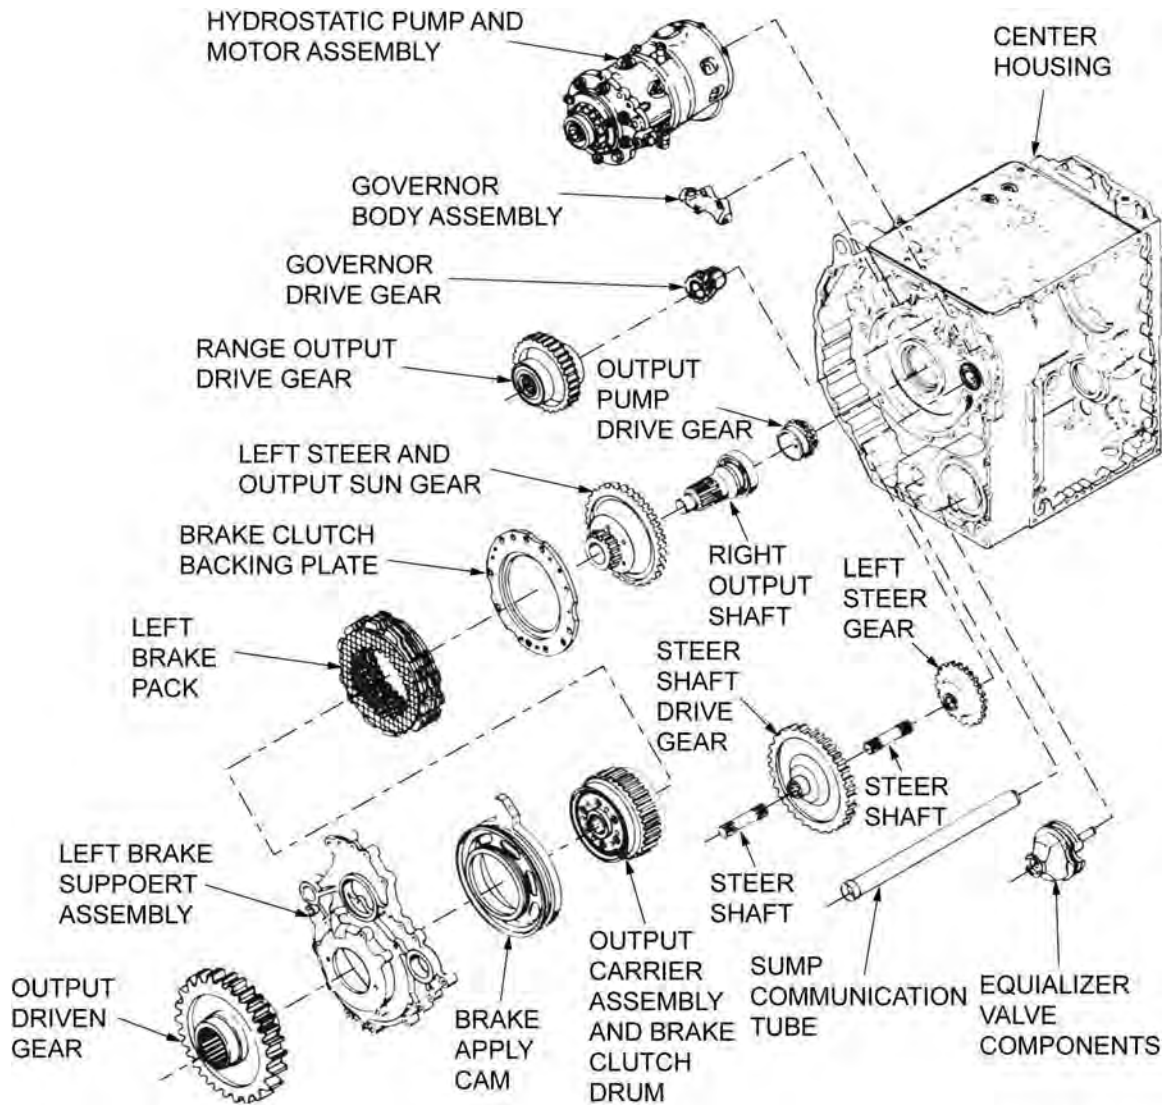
Exploded View of Major Components, Right Side of Center Housing Assembly.
